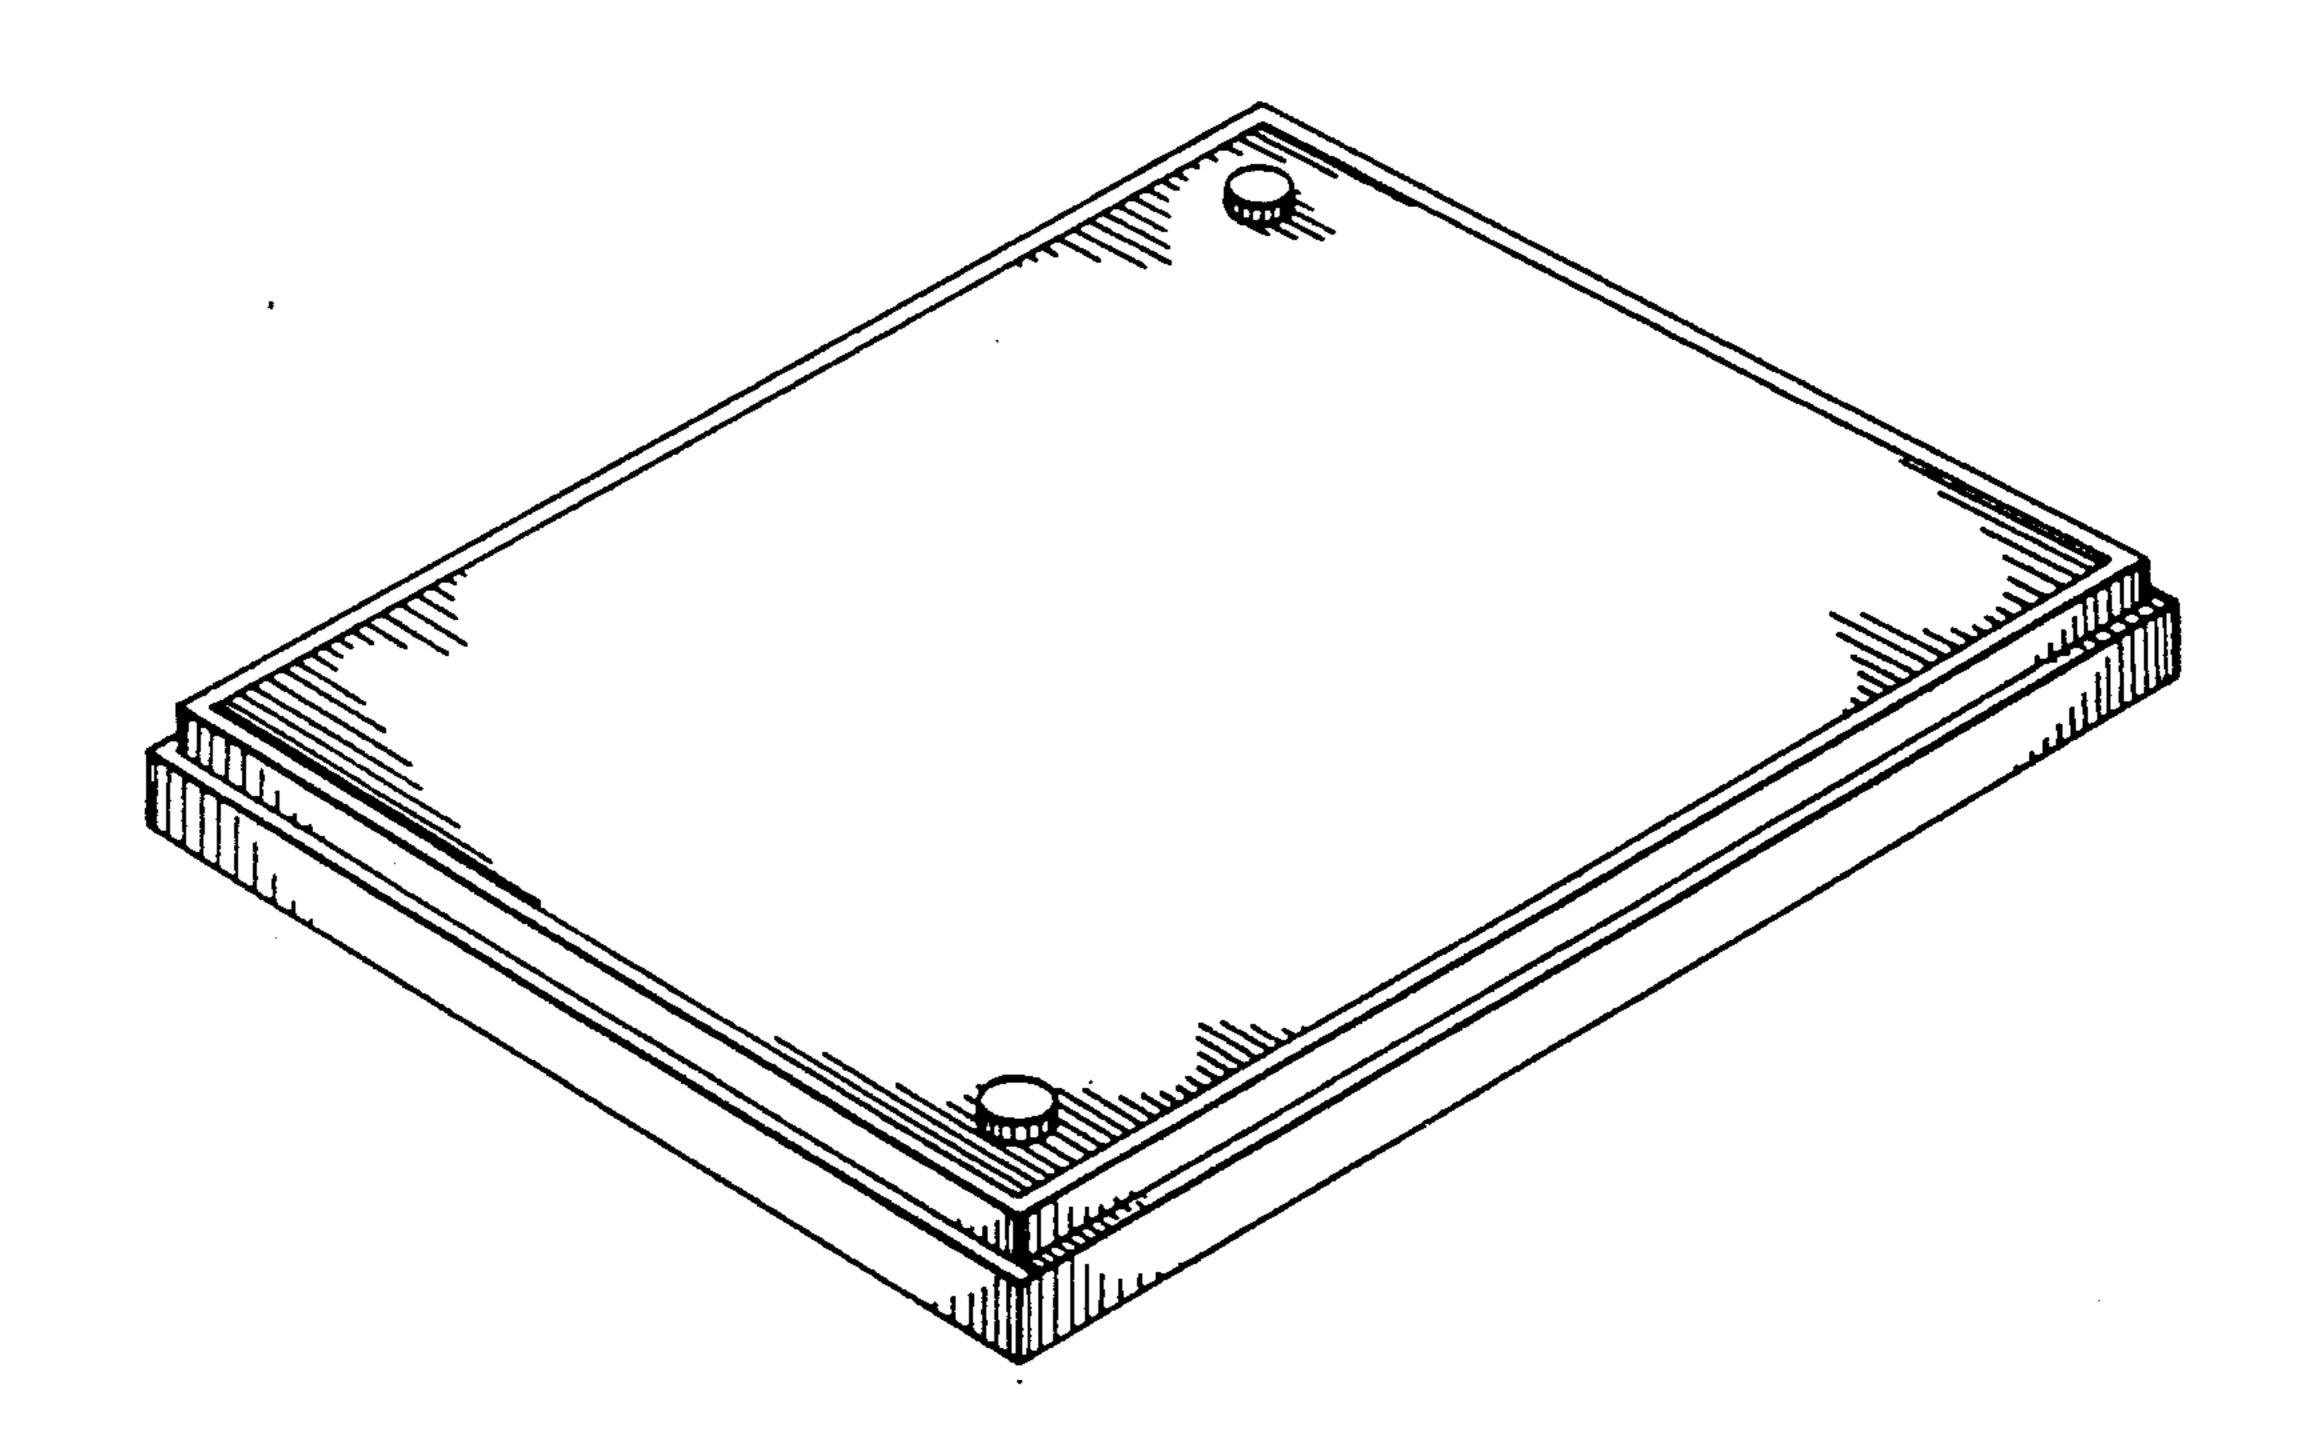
is a perspective view of a printed circuit board test fixture embodying my new design;
